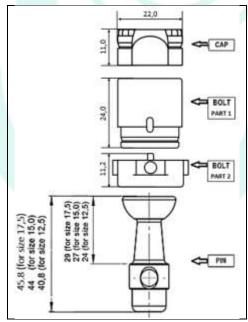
MUTARS® HD Coupling C-O-M - Dimensions (in mm)
